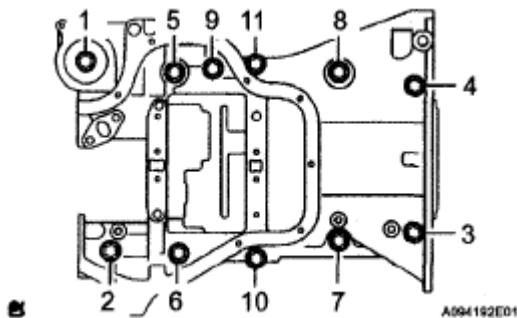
Identifying Stiffening Crankcase Assembly Bolts Sequence
